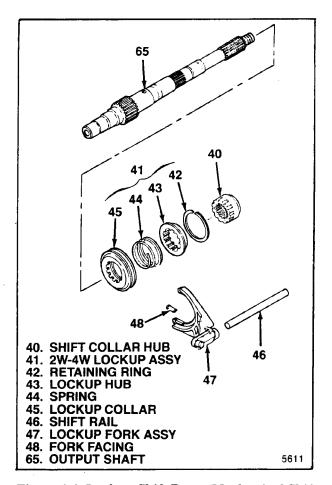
Lockup Shift Parts (Mechanical Shift)
